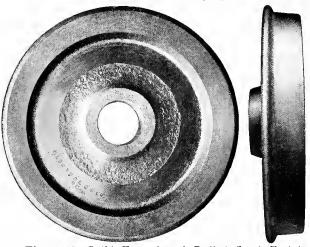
Solid Forged and Rolled Steel Freight Car Wheel. Carnegie Steel Company.
